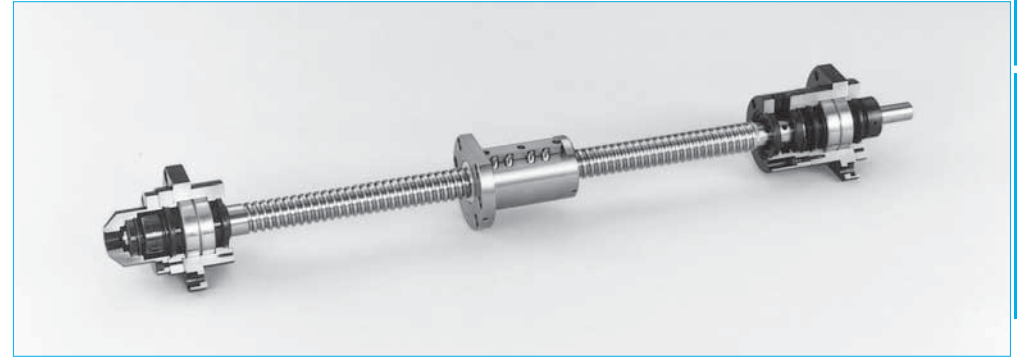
Hollow shaft ball screw for high-precision machine tools
